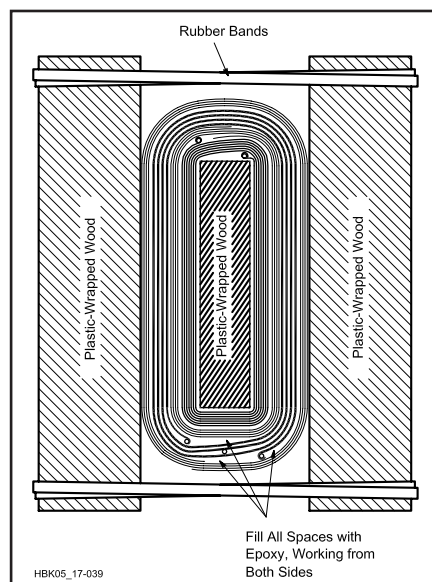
Clamping the T1 assembly and filling with epoxy.
